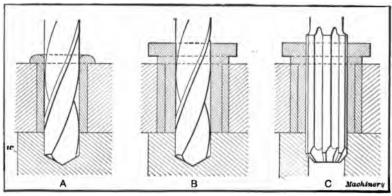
Fixed and Removable Guide Bushings for Drill Jigs
